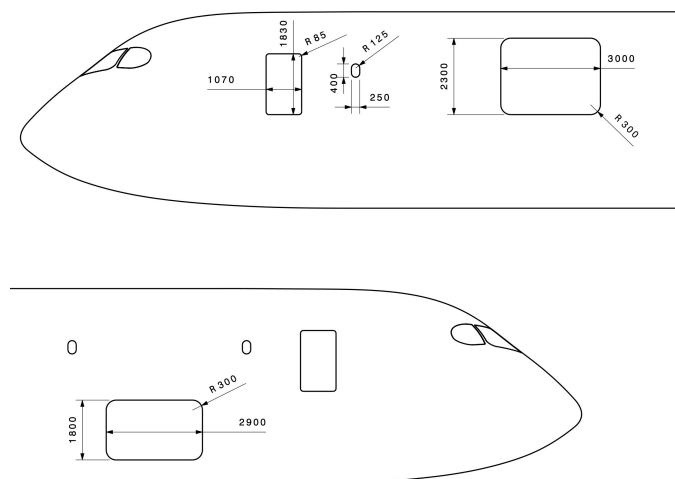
Upper deck cargo door, window, lower cargo door and Type A door dimensions (in mm)
